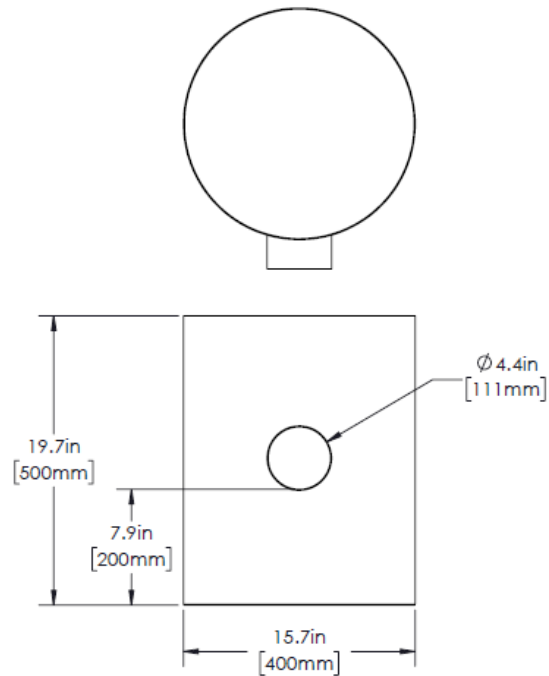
Collecting Chamber Dimensions per EN 1825-1:2004
